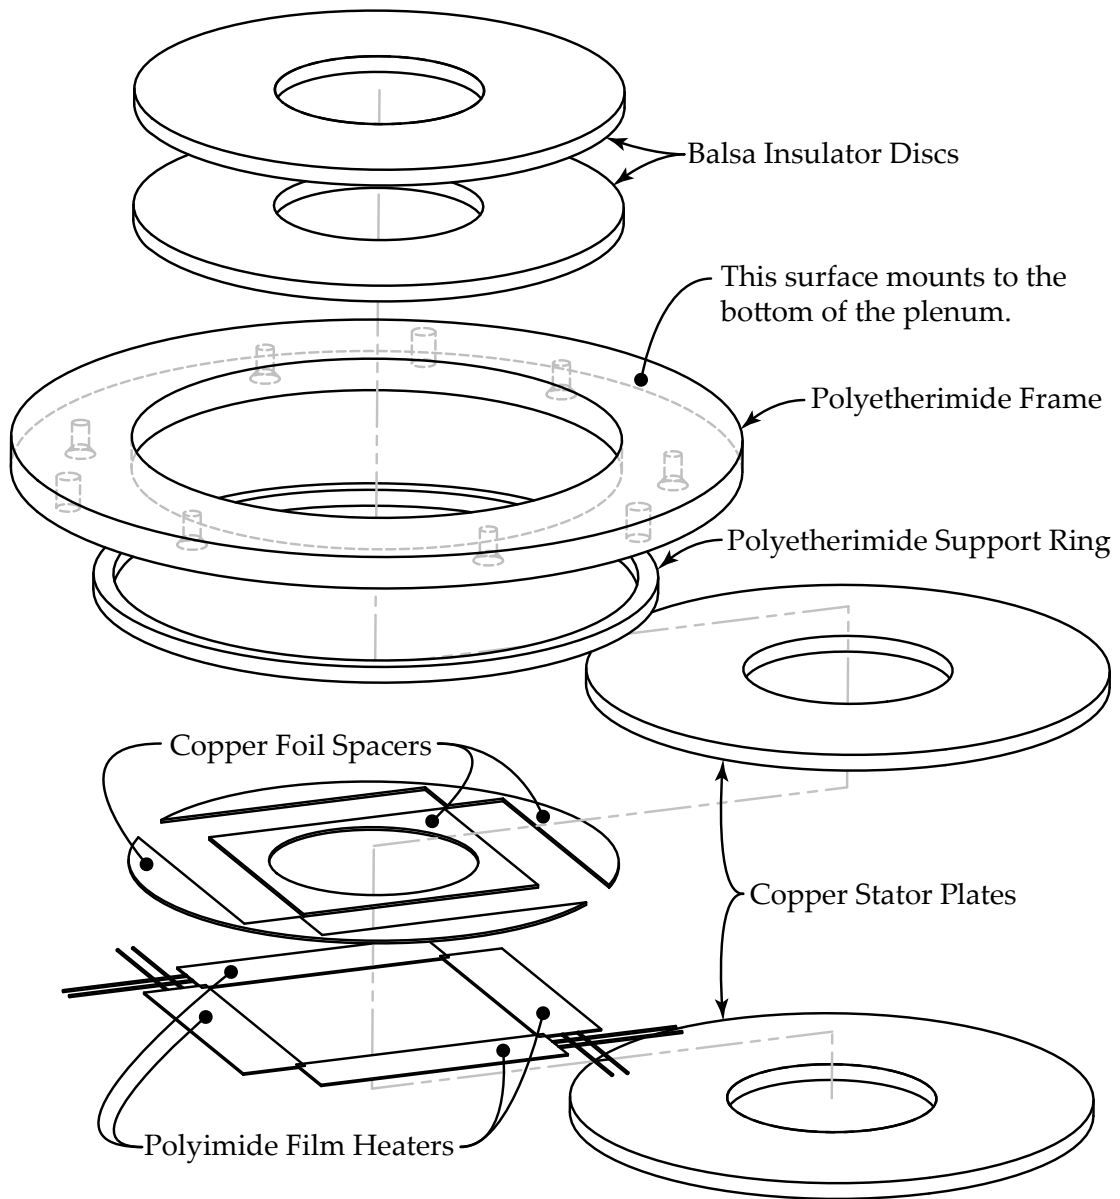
This exploded view of the circular heater apparatus shows the polyimide film heaters and the copper foil spacers.
